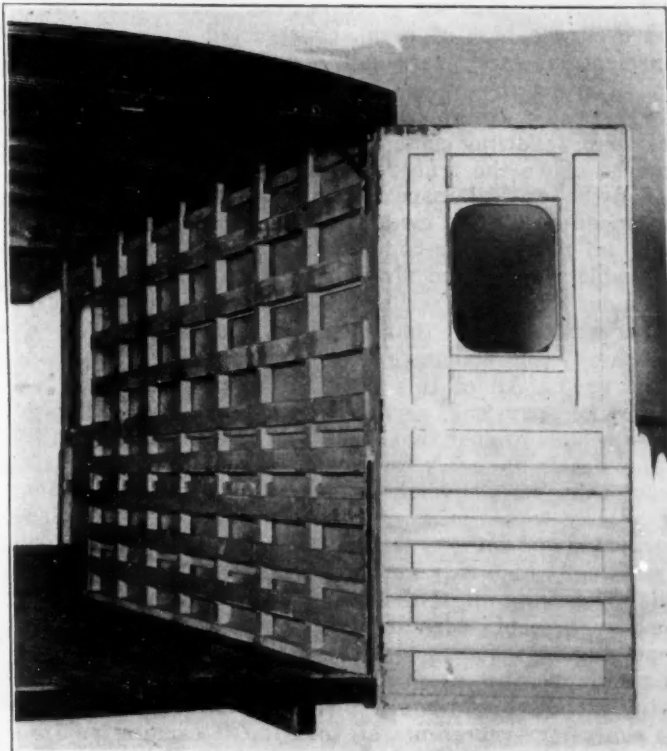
INTERIOR OF PARTIALLY ASSEMBLED PANEL BODY AND REAR DOOR
